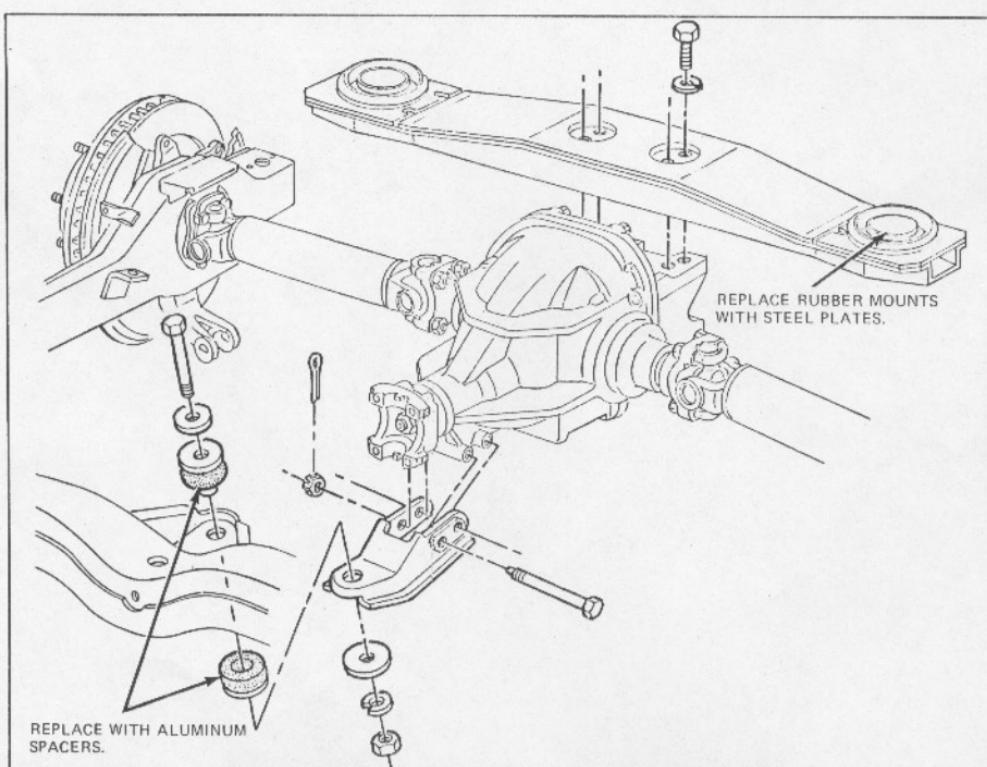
Replacement of rubber parts with solid plates and bushings.
